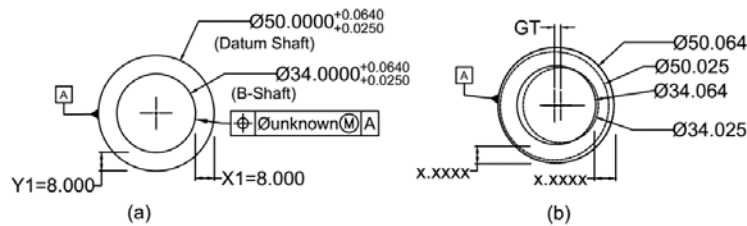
Design specification shaft without GT value (a) Shaft Dimension with fit limit tolerance (b) Shaft possibility illustrated.
